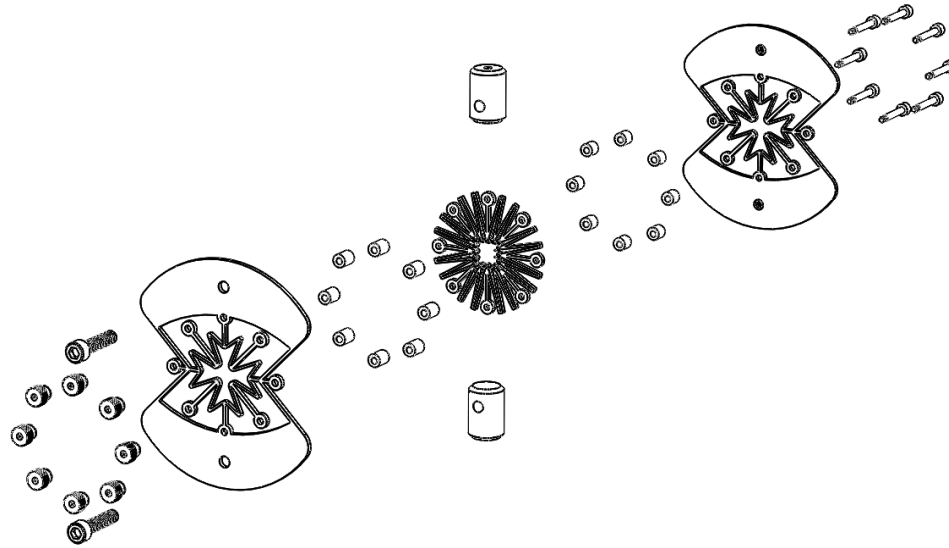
Exploded view of custom built biaxial testing apparatus.
